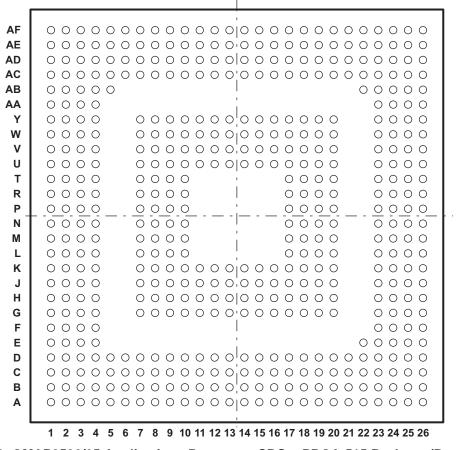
OMAP3530/25 Applications Processor CBC s-PBGA-515 Package (Bottom View)
